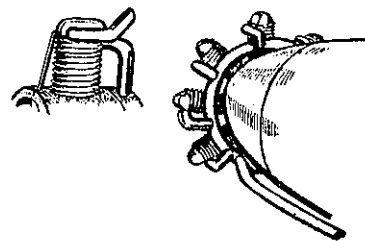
Cylinder (filed bolt), with pin for valve-rod casing and wire representing exhaust stub and induction pipe.
